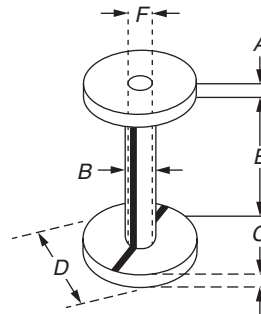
illustrates isometrically the dimensions affected by the parting lines. The heavy lines shown in Fig.1.135 indicate parting lines. There is a parting line on the bottom of the upper flange and a parting line through the centre of the part. Dimensions 'B', 'C', and 'D' are, therefore, the only dimensions affected by the parting line. Dimensions 'E' and 'F', because they are made by fixed sections of the mould, do not carry additional parting line tolerances. Dimension 'A' carries the cut off tolerance.
